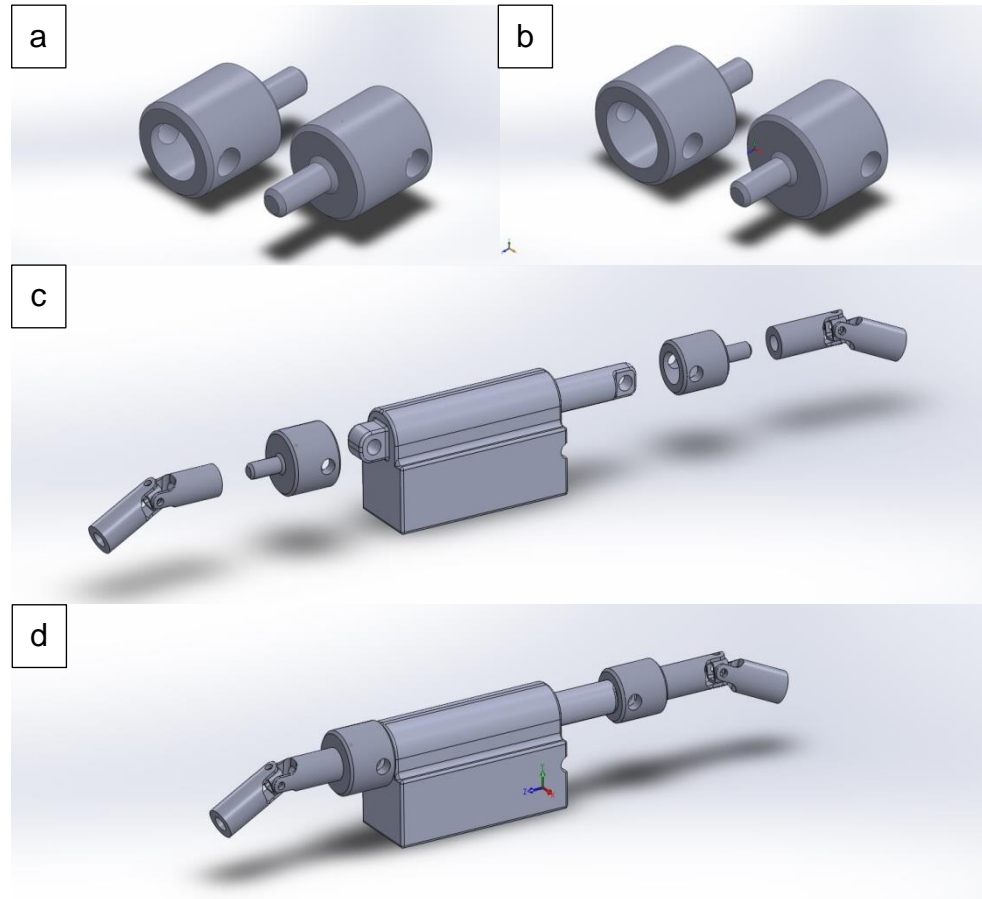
Mechanical parts used to connect the Gough-Stewart actuators to the universal joints.
